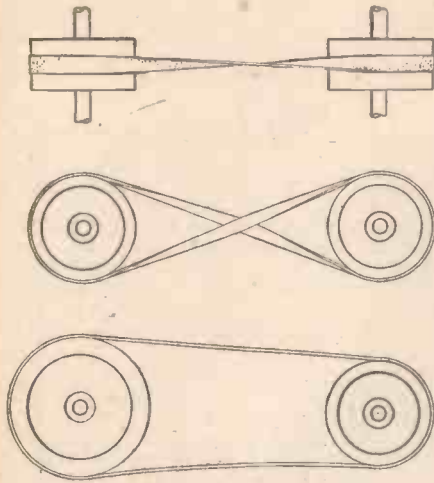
Examples of flat belts and pulleys. Reversal of direction of rotation can be obtained by simply shifting the belt.
